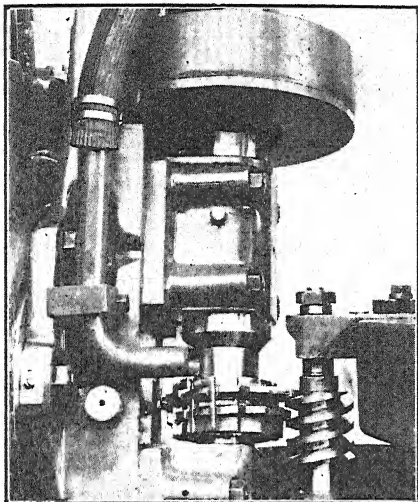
Hobbing a Two-Thread Worm with a Gould and Eberhardt Tapered-Worm Generating Hob.
